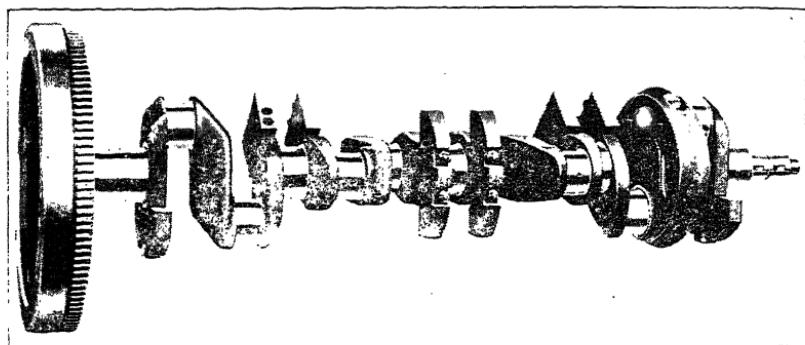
Crankshaft Assembly with Counter Weights, Balancer, and Flywheel
